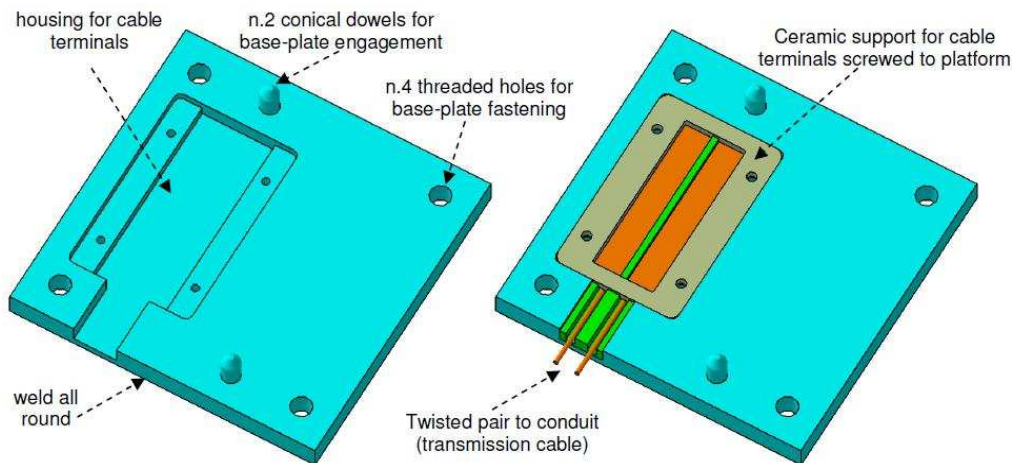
Platform permanently welded to Vacuum Vessel
